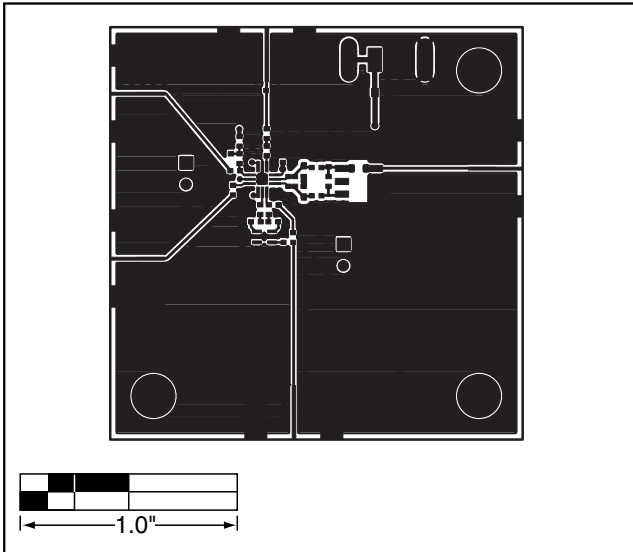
MAX2387/MAX2388/MAX2389 EV Kit PC Board Layout—Component Side
